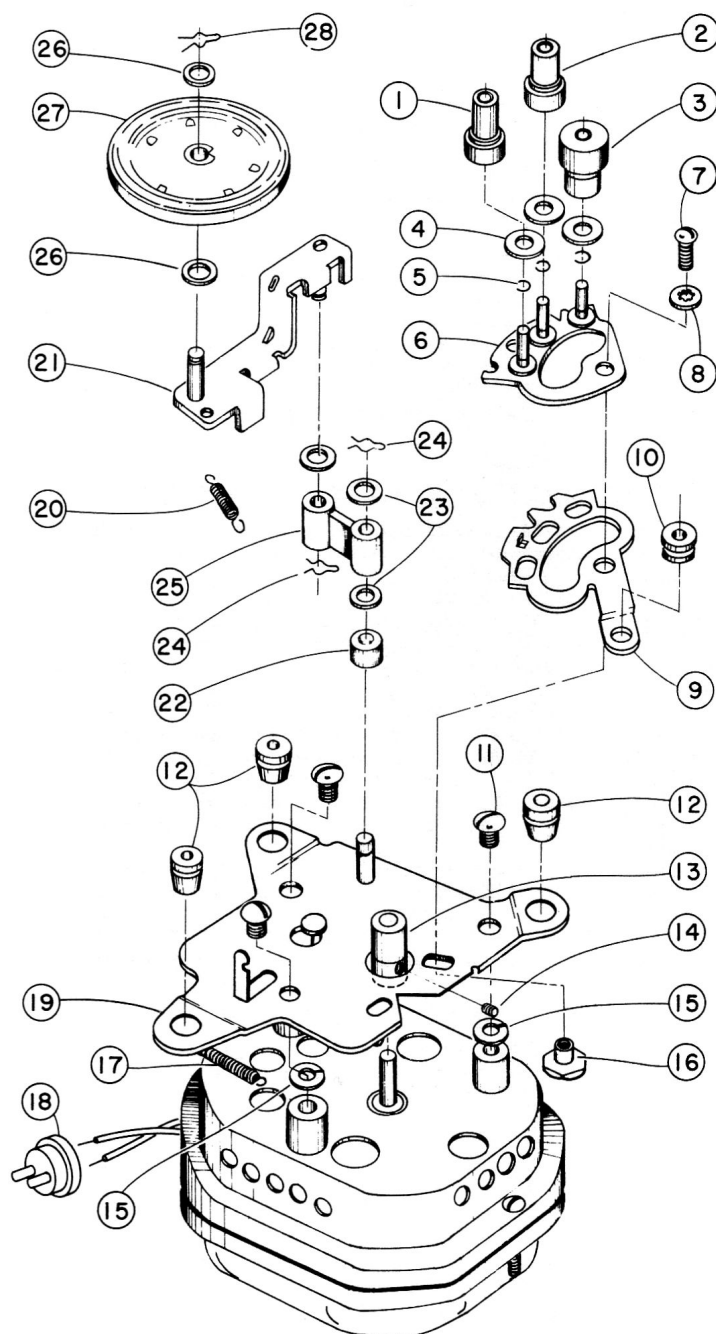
Four-Pole Motor Assembly (Stamped 971526-3)
